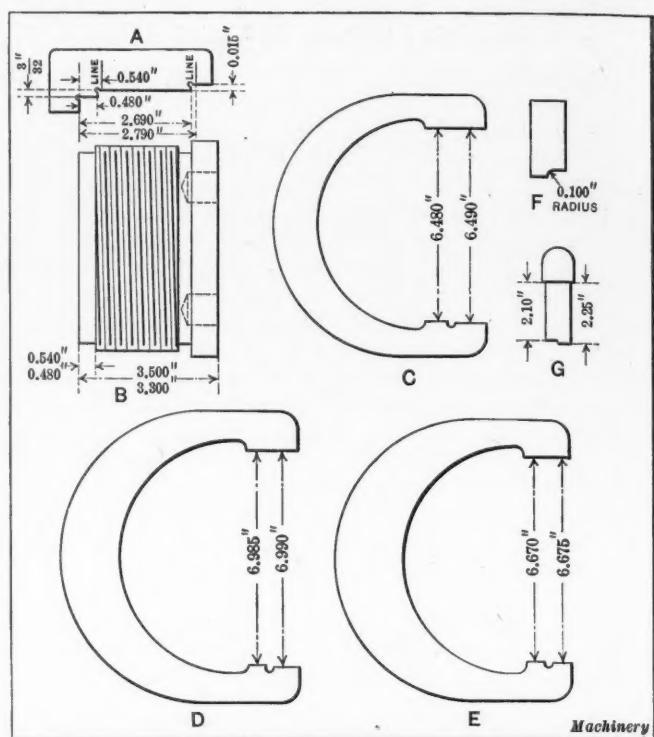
Base Plug after Tenth Operation and Inspection Gages
